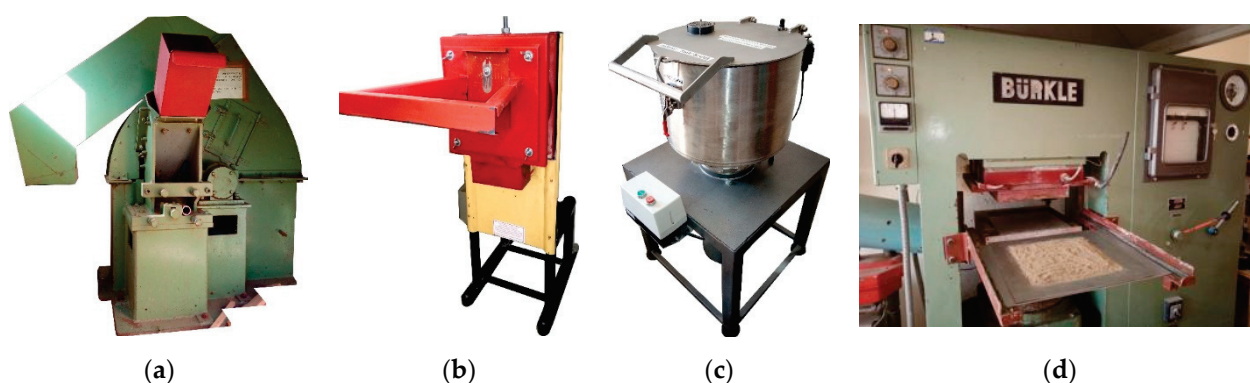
(a) Knife chipper, (b) hammermill, (c) custom-built blender, and (d) hydraulic press.
